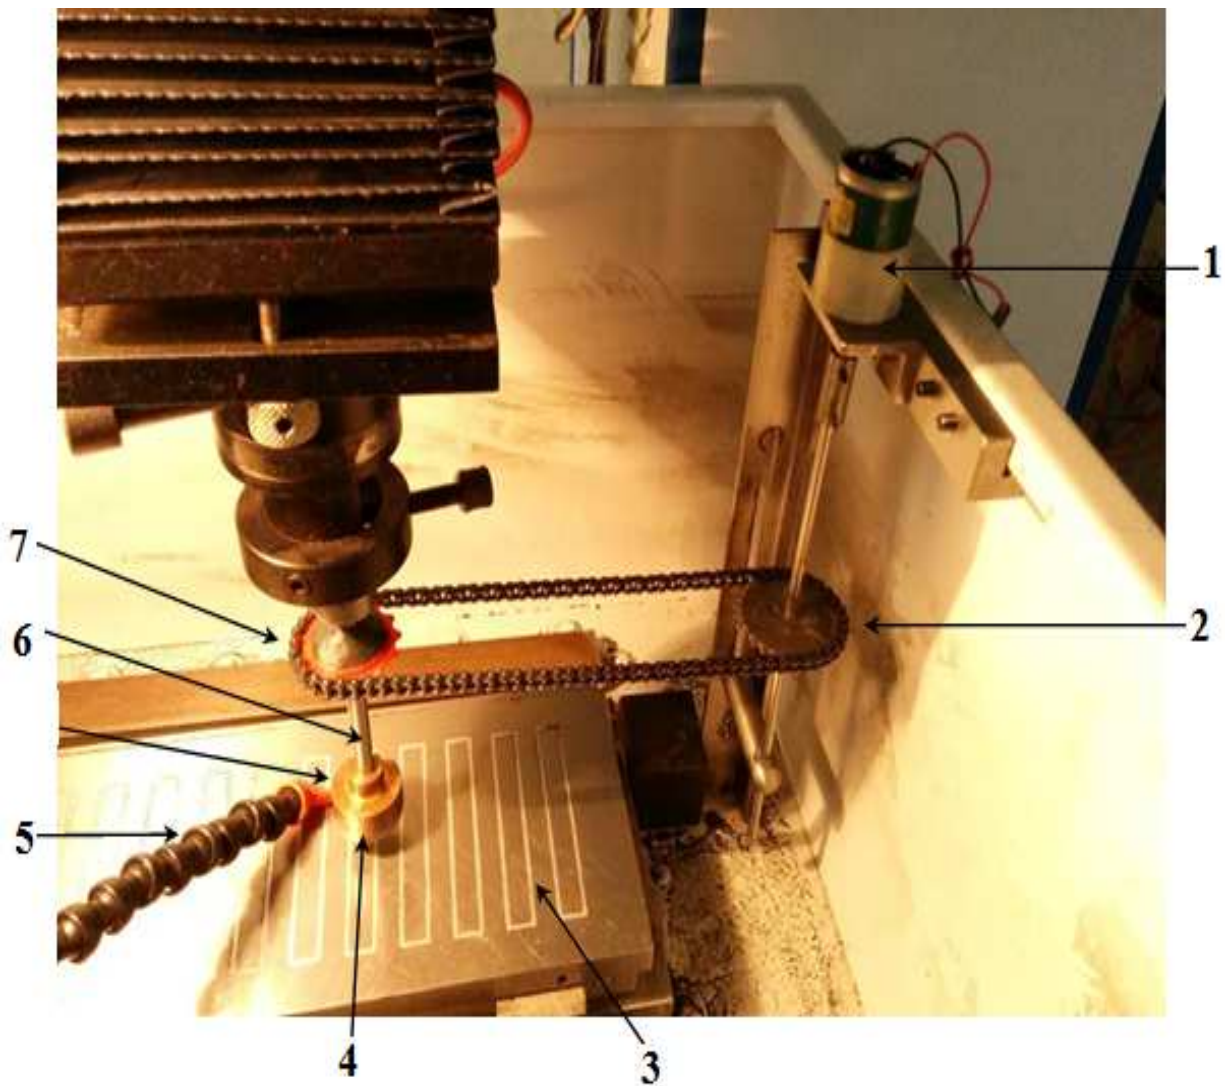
Photographic view of HEDME System setup (1: DC Motor, 2: Chain Drive for the rotation motion, 3: Magnetic Chuck for Holding workpiece, 4: Hybrid EDM Electrode, 5: Flushing Pipe, 6: Electrode Holder, 7: Plastic Gear)
